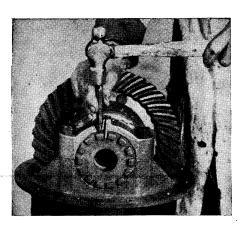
Mark right-hand differential bearing adjuster with punch. (This is for relocating when reassembling)
